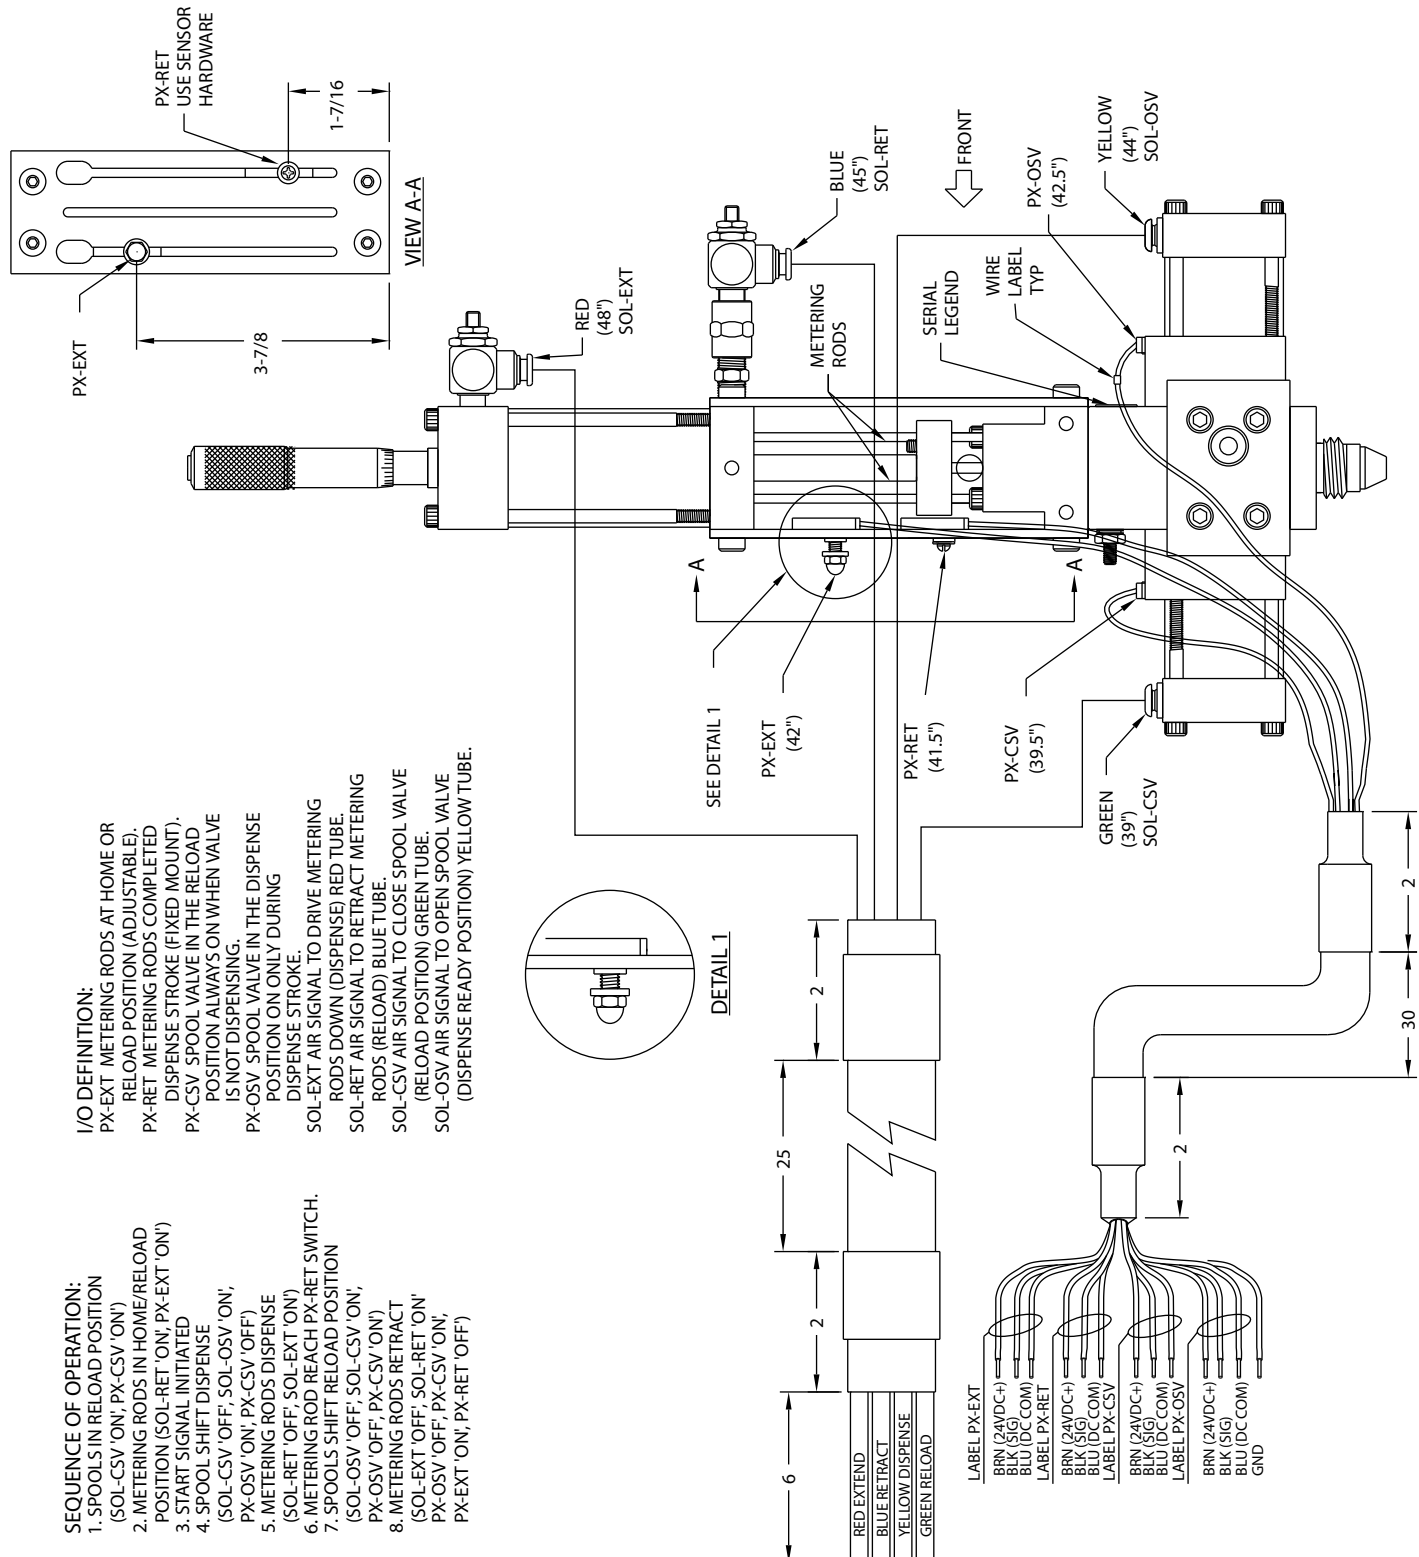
Micrometer PD44 Metering Valve Electrical Requirements
